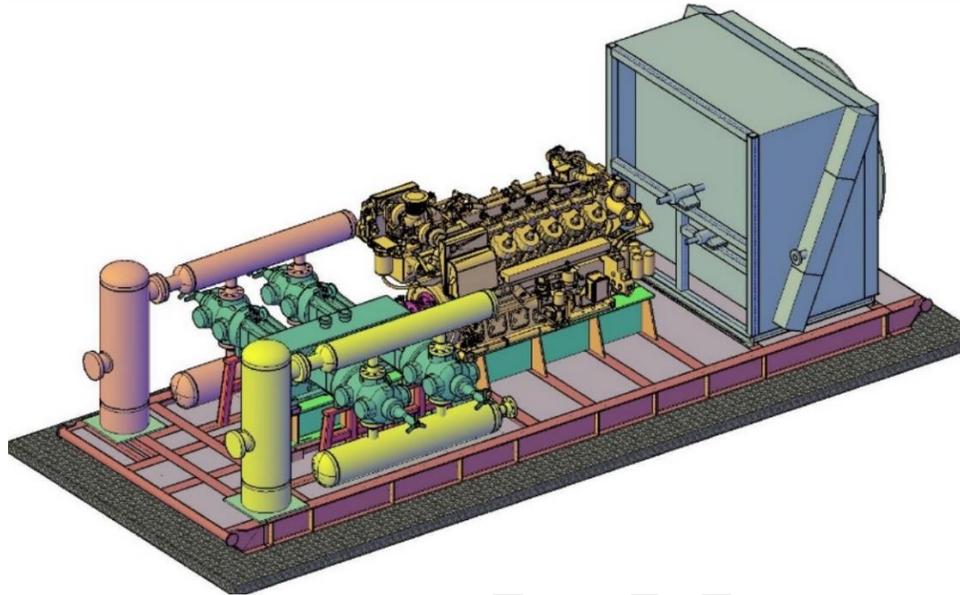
Equipment mounted on a fabricated steel skid mounted directly onto a carefully prepared caliche or gravel pad.
